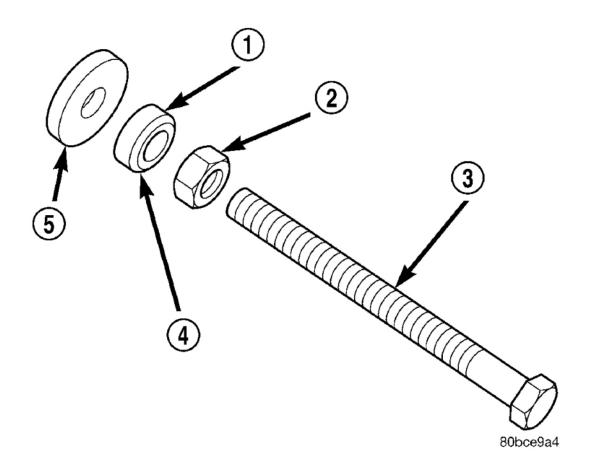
Proper Assembly Method For Special Tool 8512 Courtesy of CHRYSLER LLC
